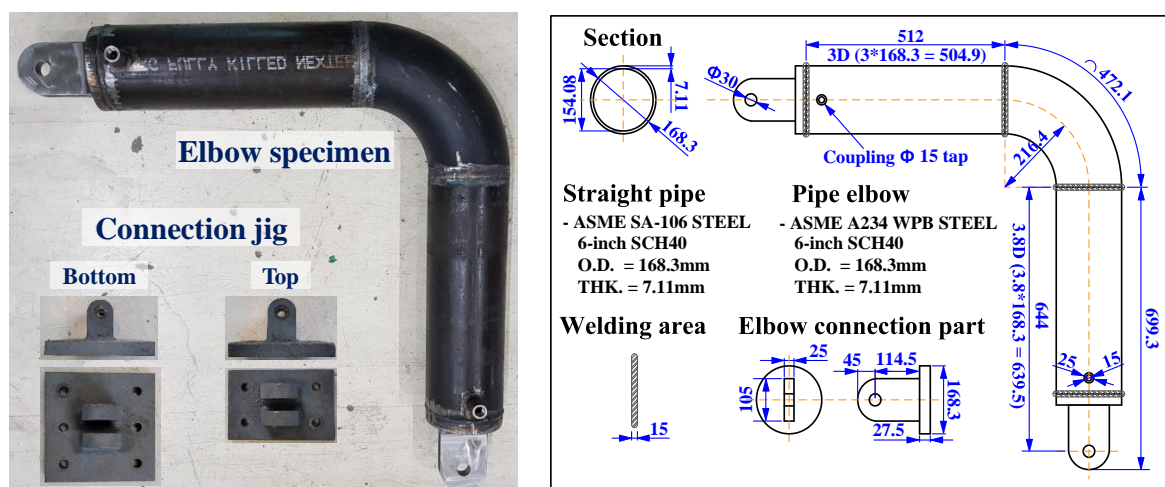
Test specimen composed of a 90-degree pipe elbow and straight pipes.
